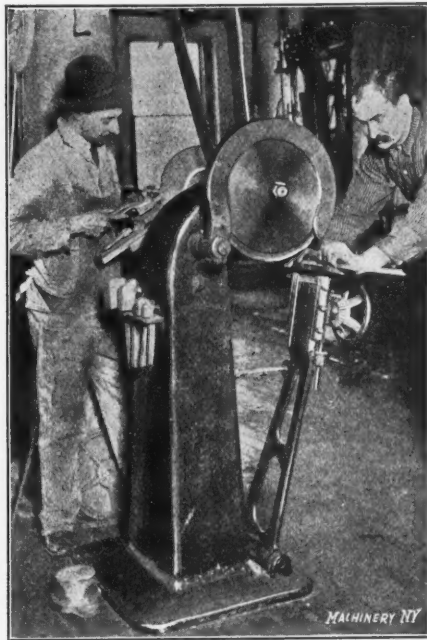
Cutting High-speed Steel with rapidly-revolving Plain Tool Steel Disk
